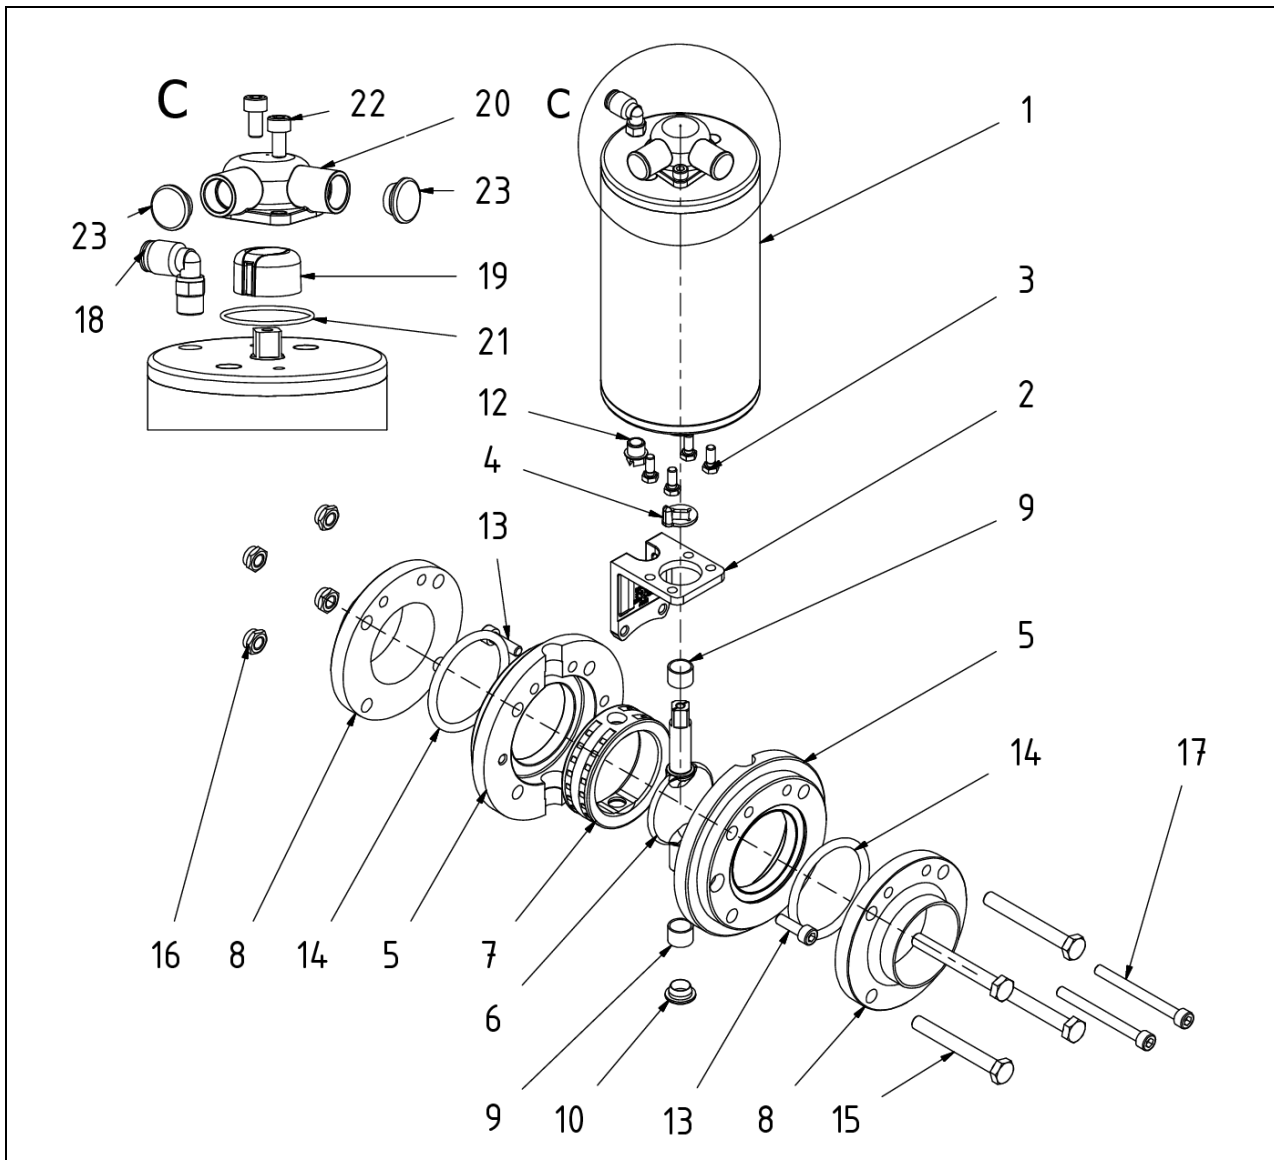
Structure of Compact Butterfly Valve with Pneum. Actuator VMove
